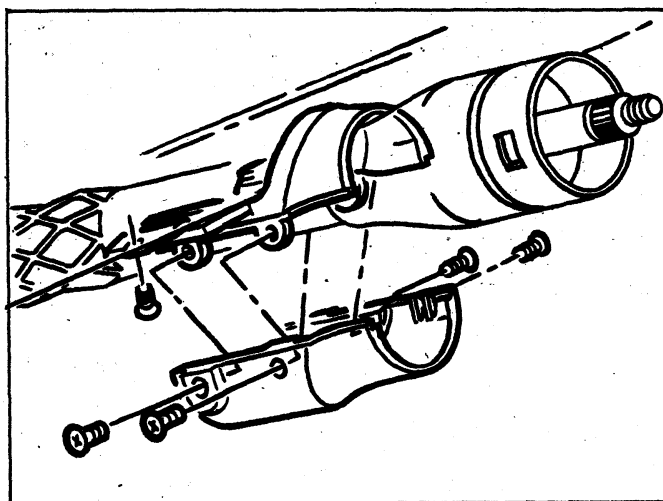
Mast Jacket Cover Attachments—Chevy II
